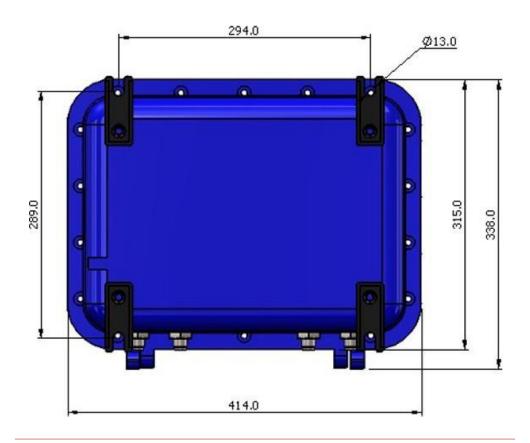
Aluminum Enclosure Mounting Dimensions
